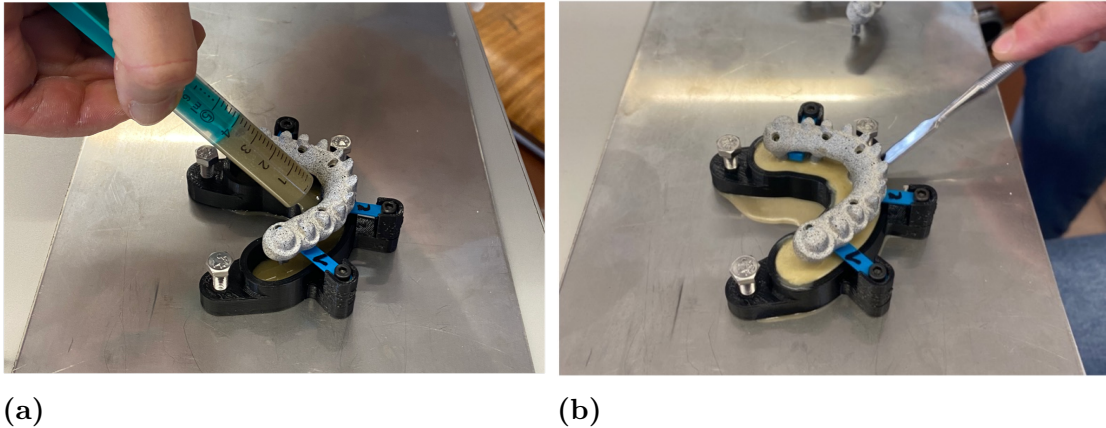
Technovit[®] 4000 setting: (a) Injection; (b) Removing the excess.
